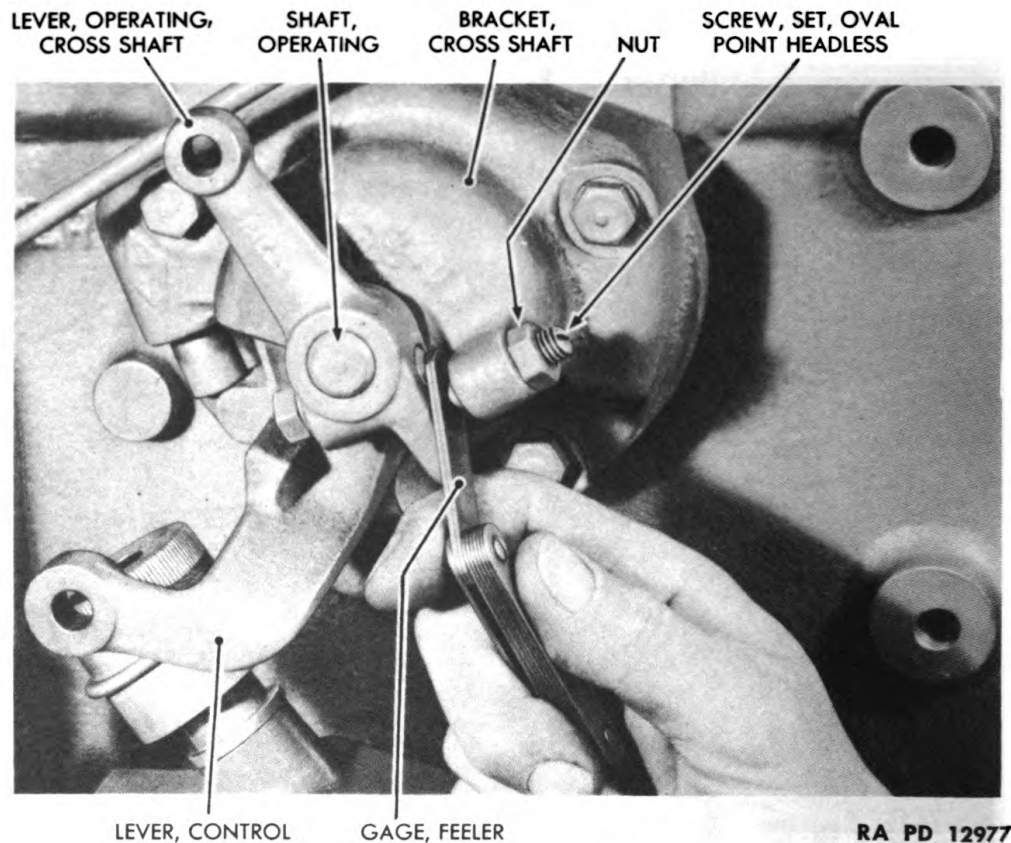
Adjusting Clearance between Cross Shaft Bracket Set Screw and Operating Lever
